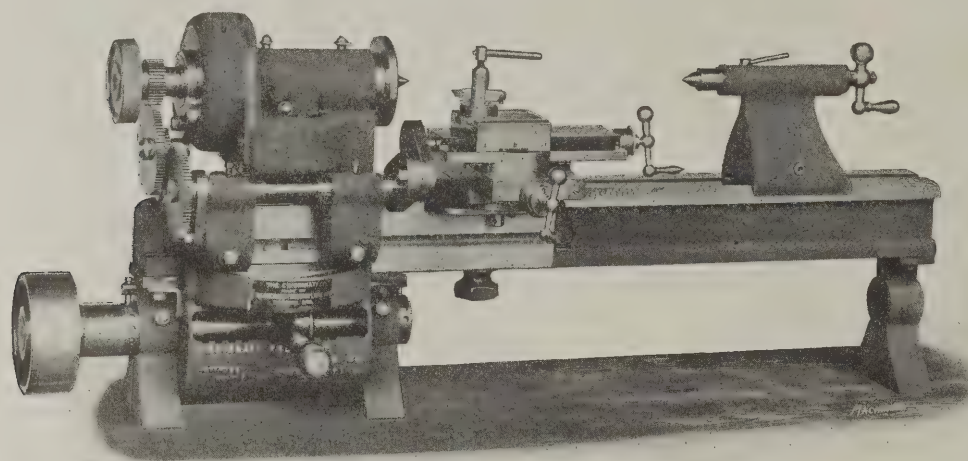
Cincinnati Friction-driven Precision Lathe with Slide-rest Screw-cutting Attachment
